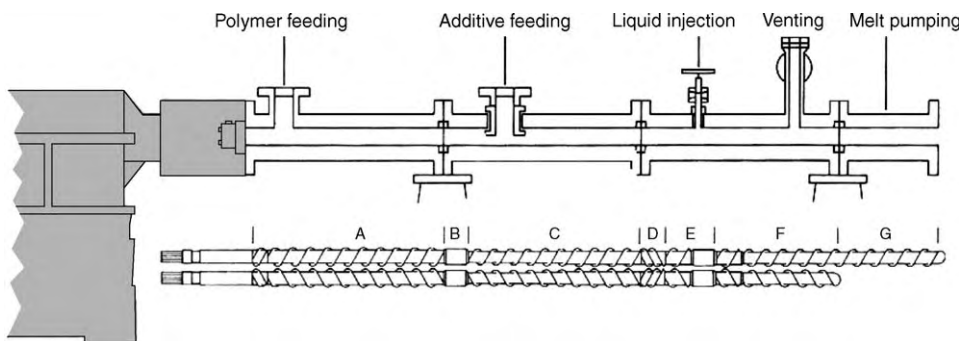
Counterrotating, tangential, nonintermeshing TSE. (Schematic, Courtesy of Welding Engineers.)
